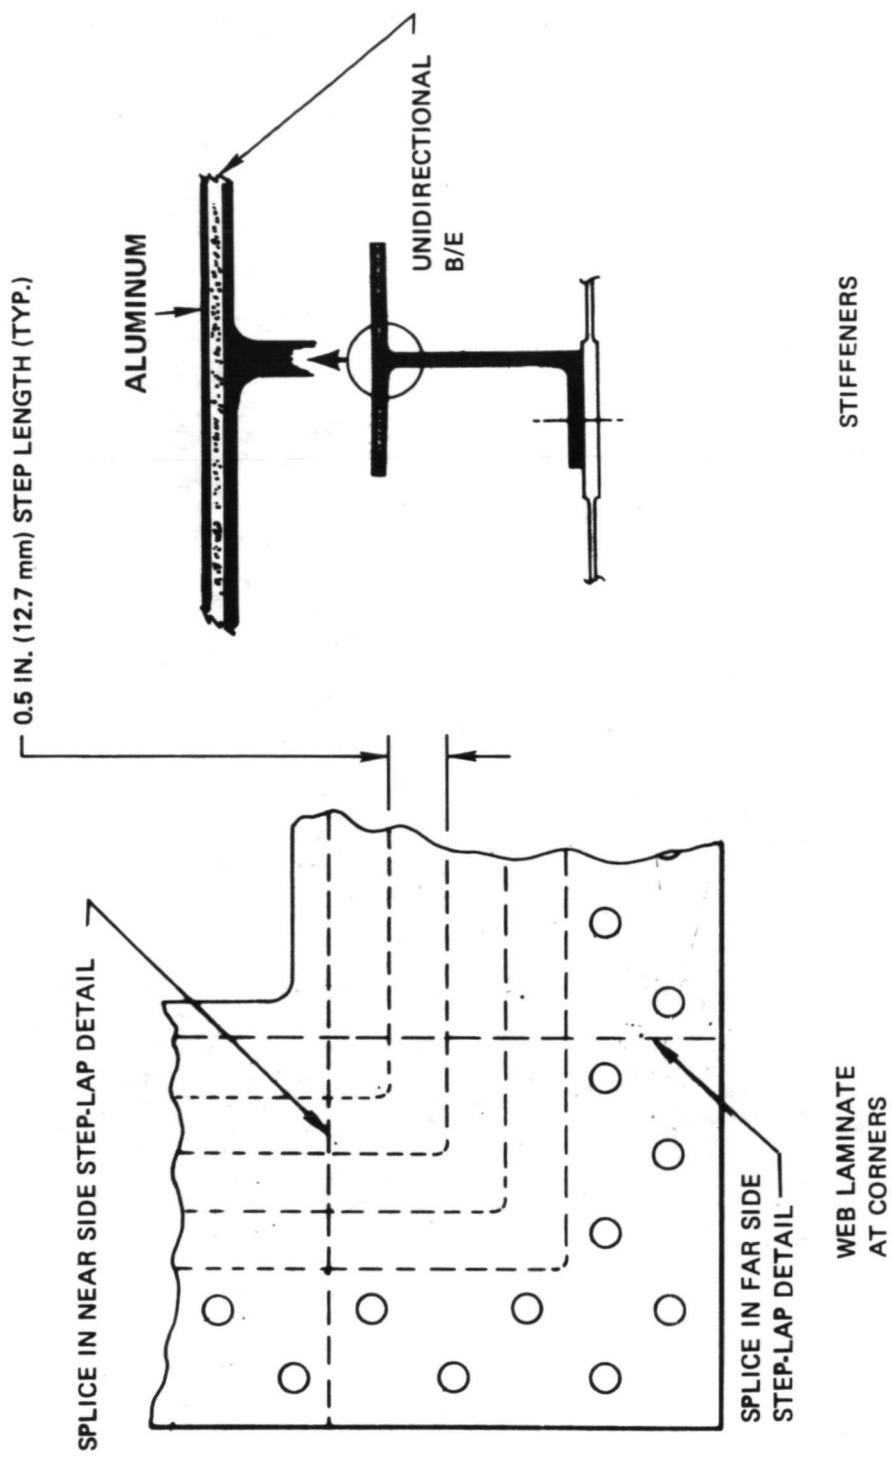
B/E REINFORCED SHEAR WEB DESIGN DETAILS
